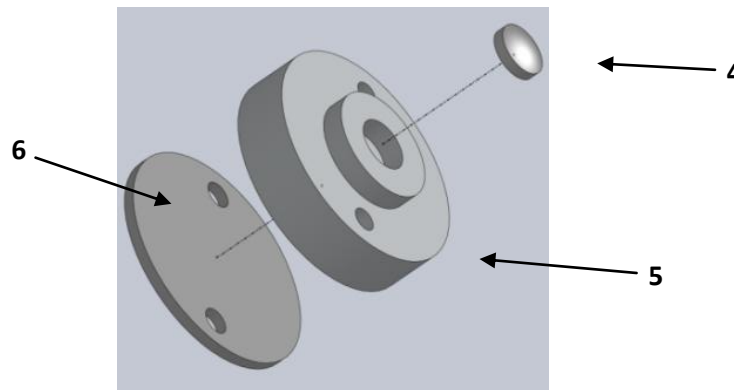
Lower Lens Assembly (B) – (4, 5, 6)
